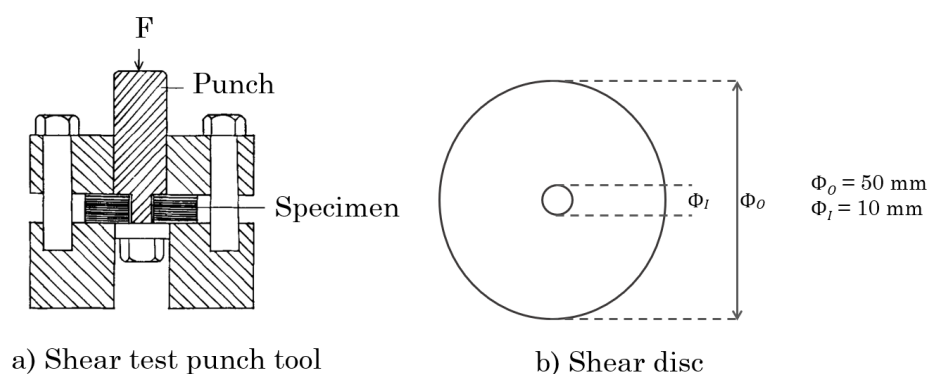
ASTM D732 shear test: a) shear test punch tool assembly. b) Punched shear disc ¹⁸⁹.
